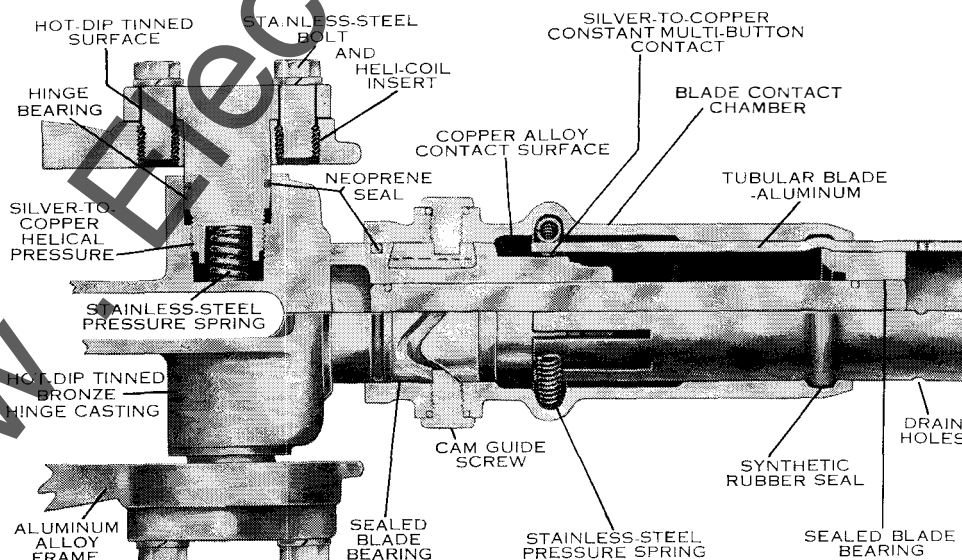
Sectional view, showing hinge-pin and blade-contact construction.
